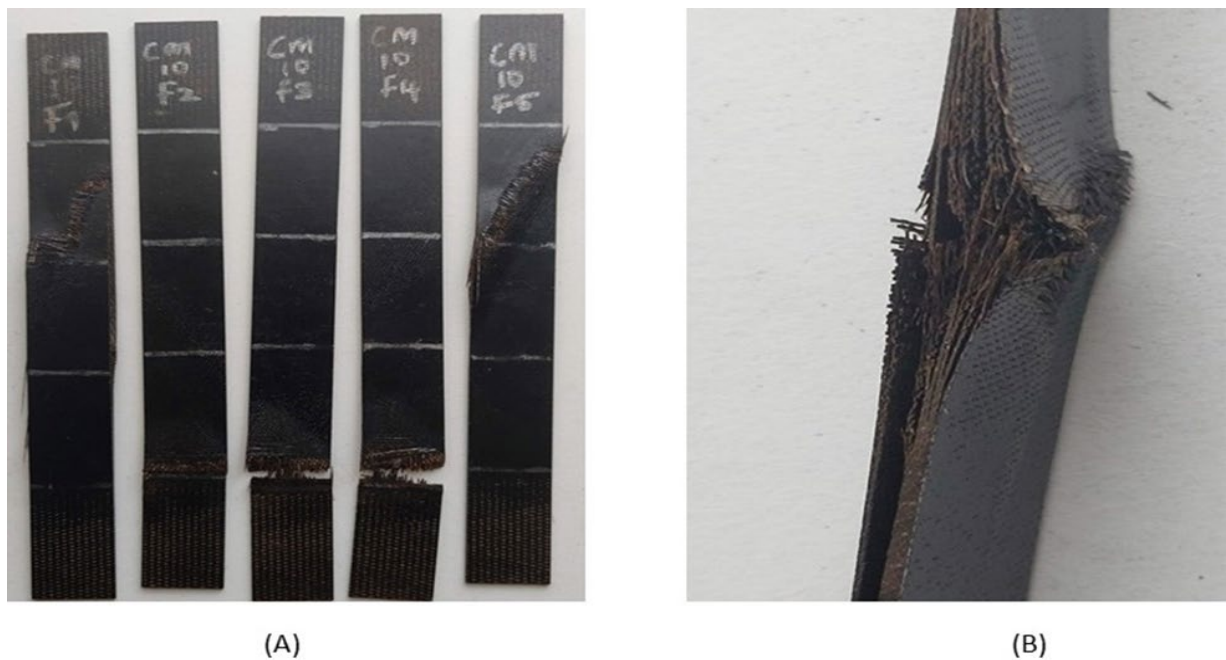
Fractured CM10 test coupons (A) and cross-section of damaged CM10 coupon (B) after tensile testing.
